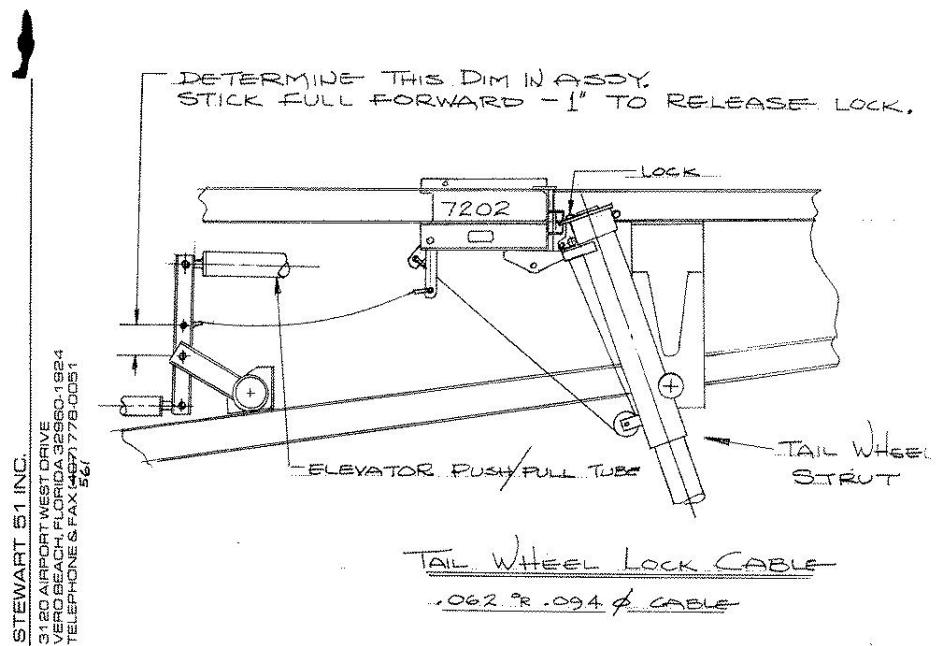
Sketch for fabrication of tailwheel unlock cable.
